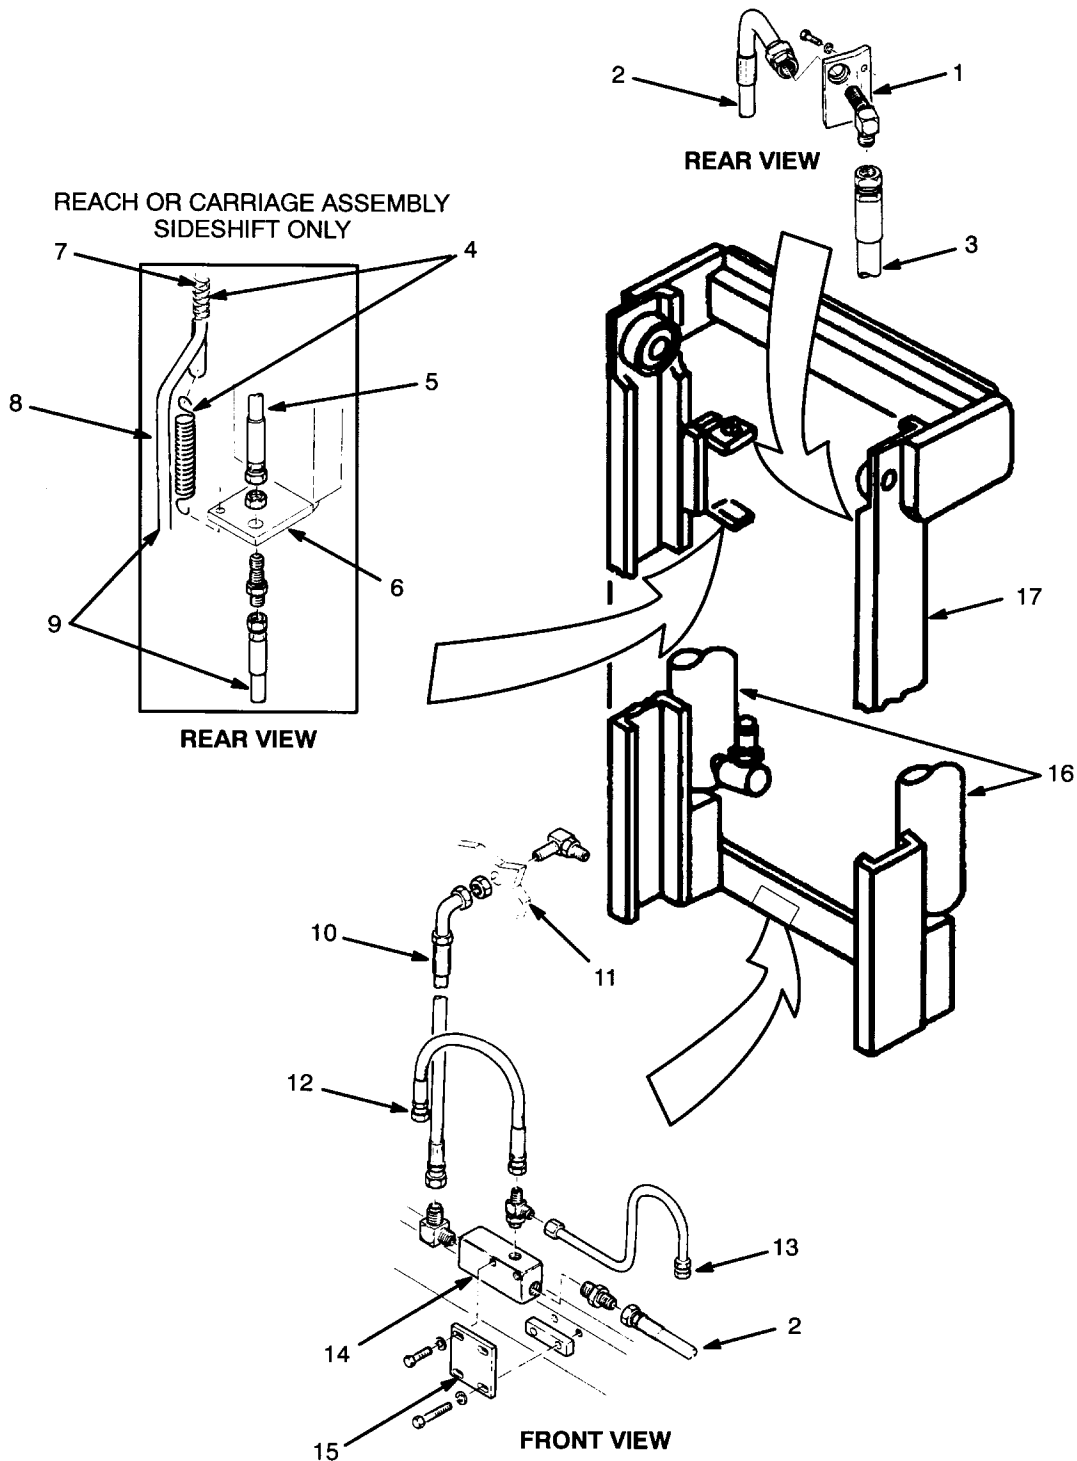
Hose and Cable Assemblies-Outer Weldment
